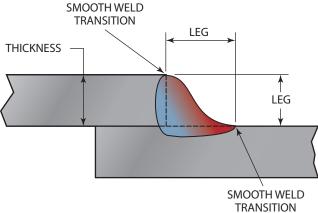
The legs of a fillet weld should generally be equal to the thickness of the base metal.
